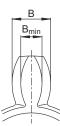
Measurement of Gear Rim Wear on the ROTEX® Claw Coupling
